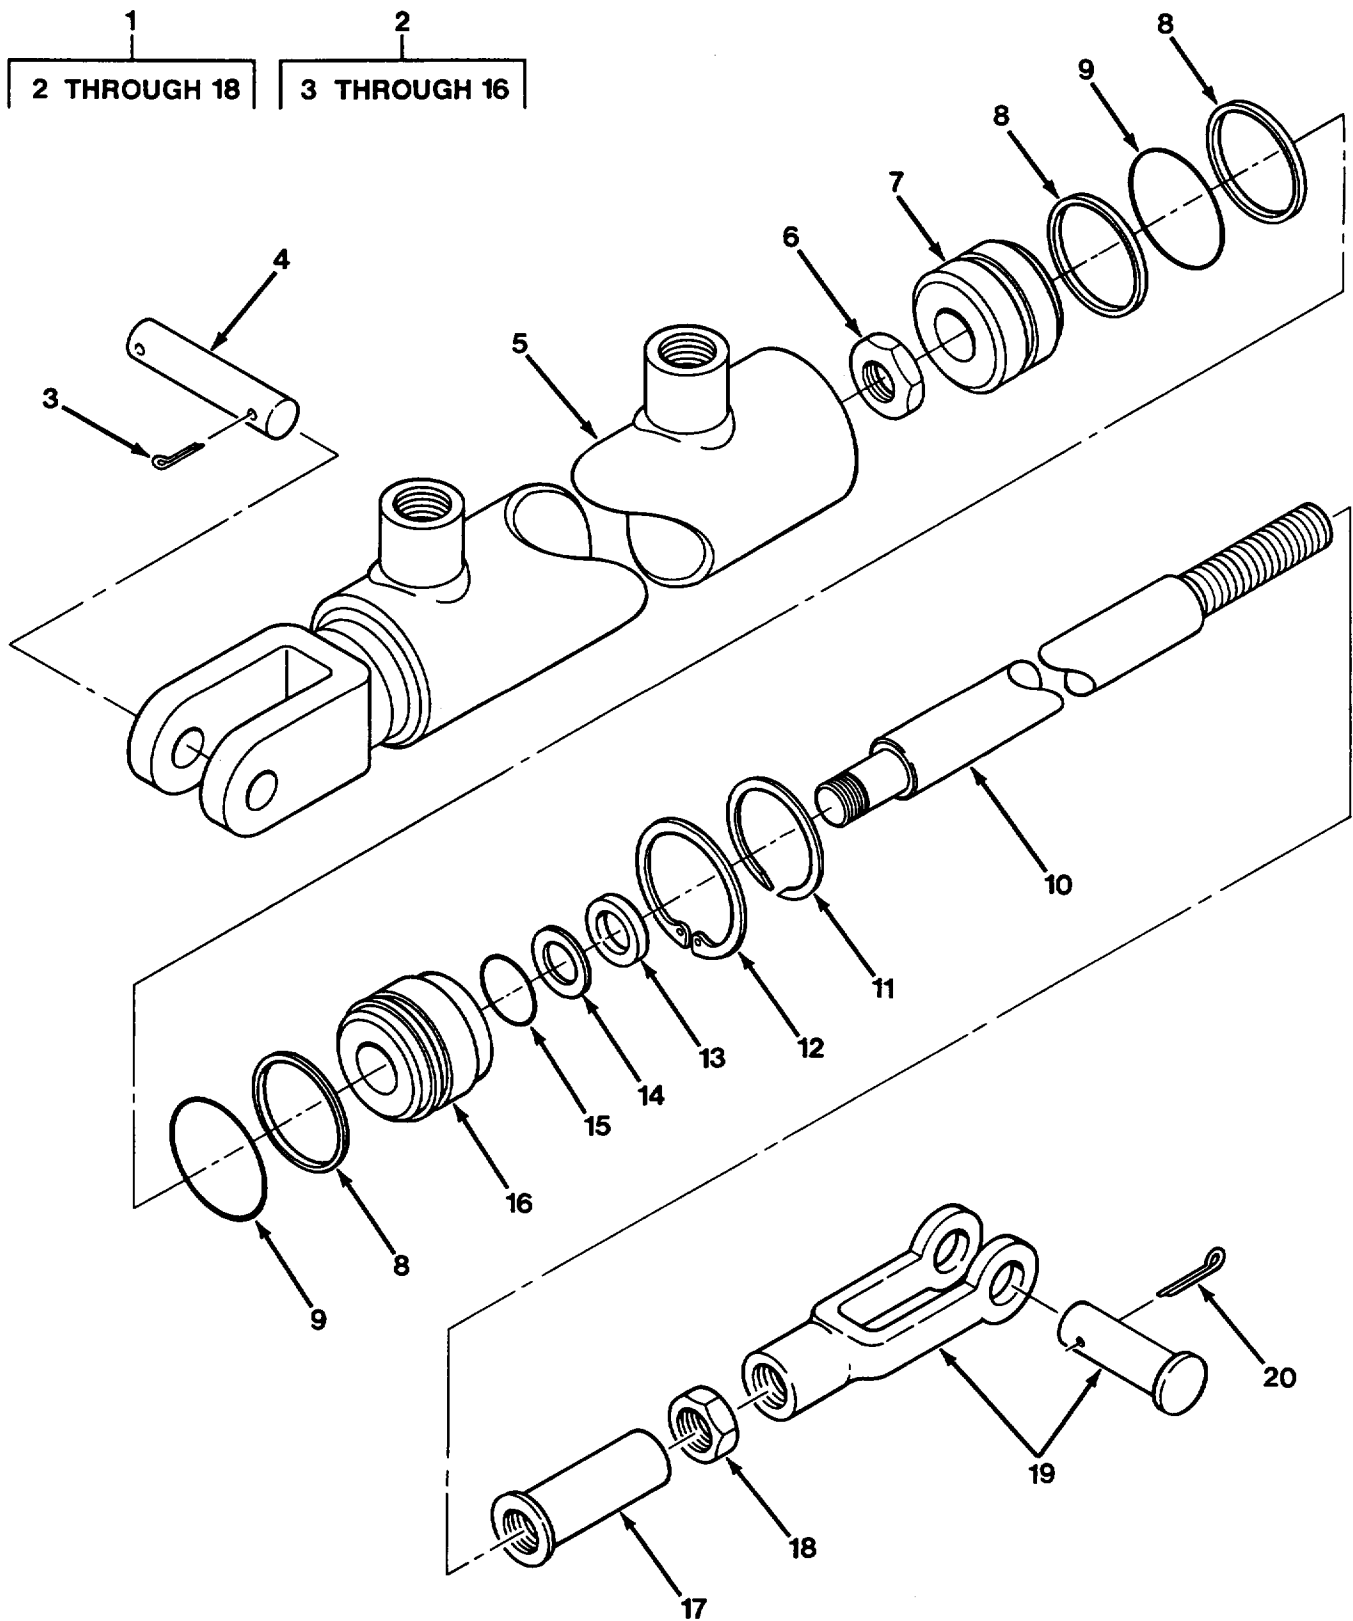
SPRAY BAR CYLINDER ASSEMBLY
